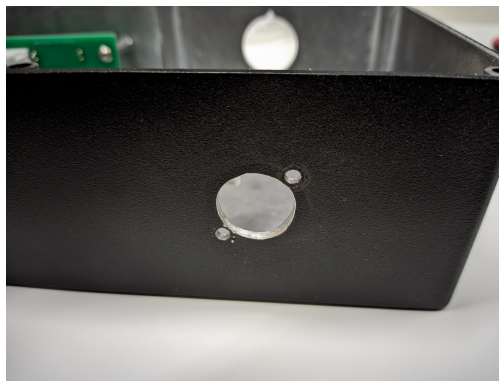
M16 hole drilled into AuxBox for Phoenix Contact panel connector.
